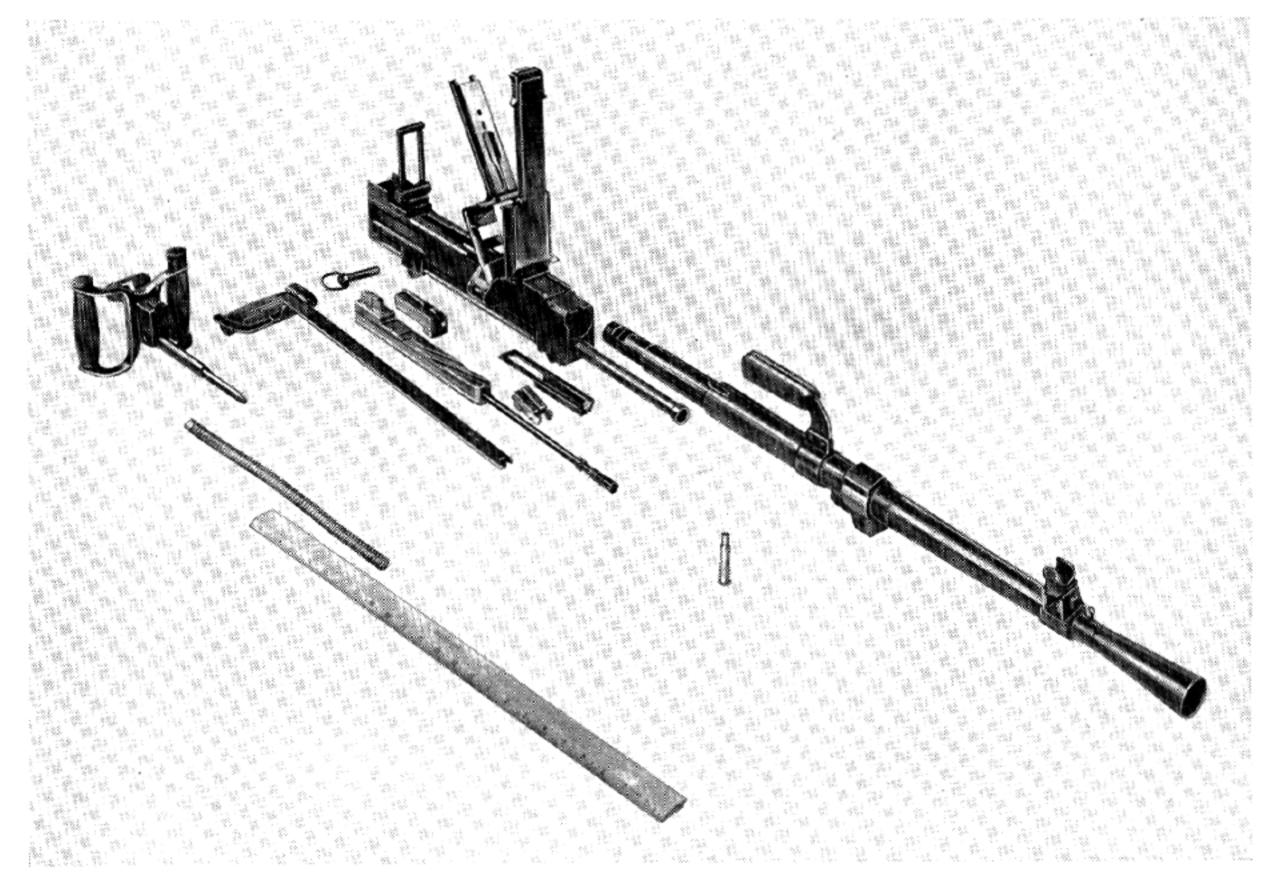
The SG-43 field stripped. The parts of the two-stage feed may be seen near the front end of the receiver. The belt feed pawls are still on the gun.
